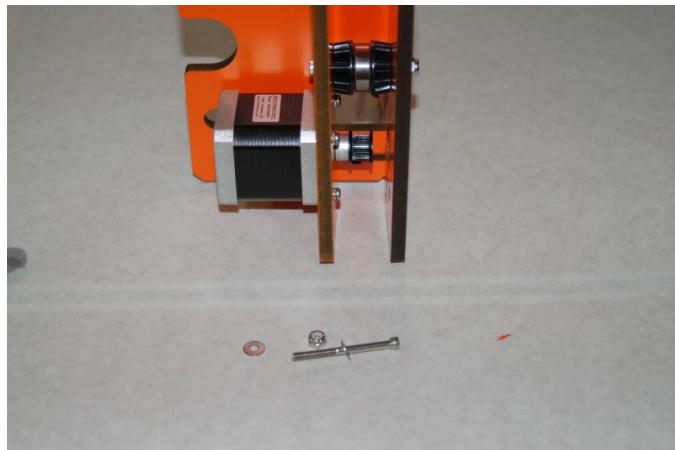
Installing the Tri-Support idler bearing assemblies
